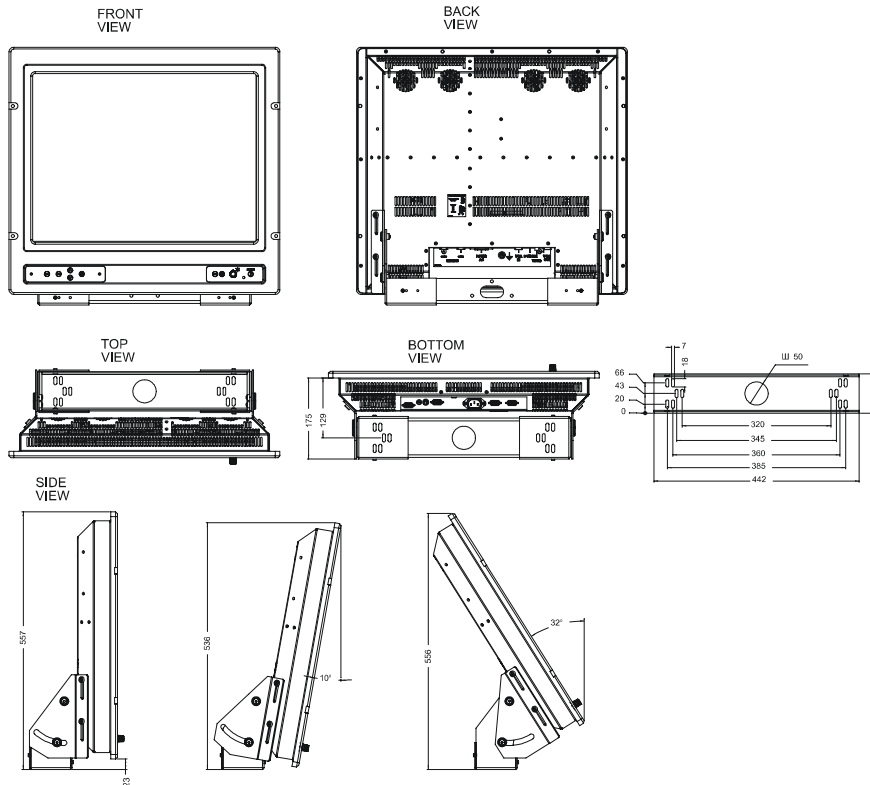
23" TFT Hatteland JH 23 T02 MMD. Bracket View
